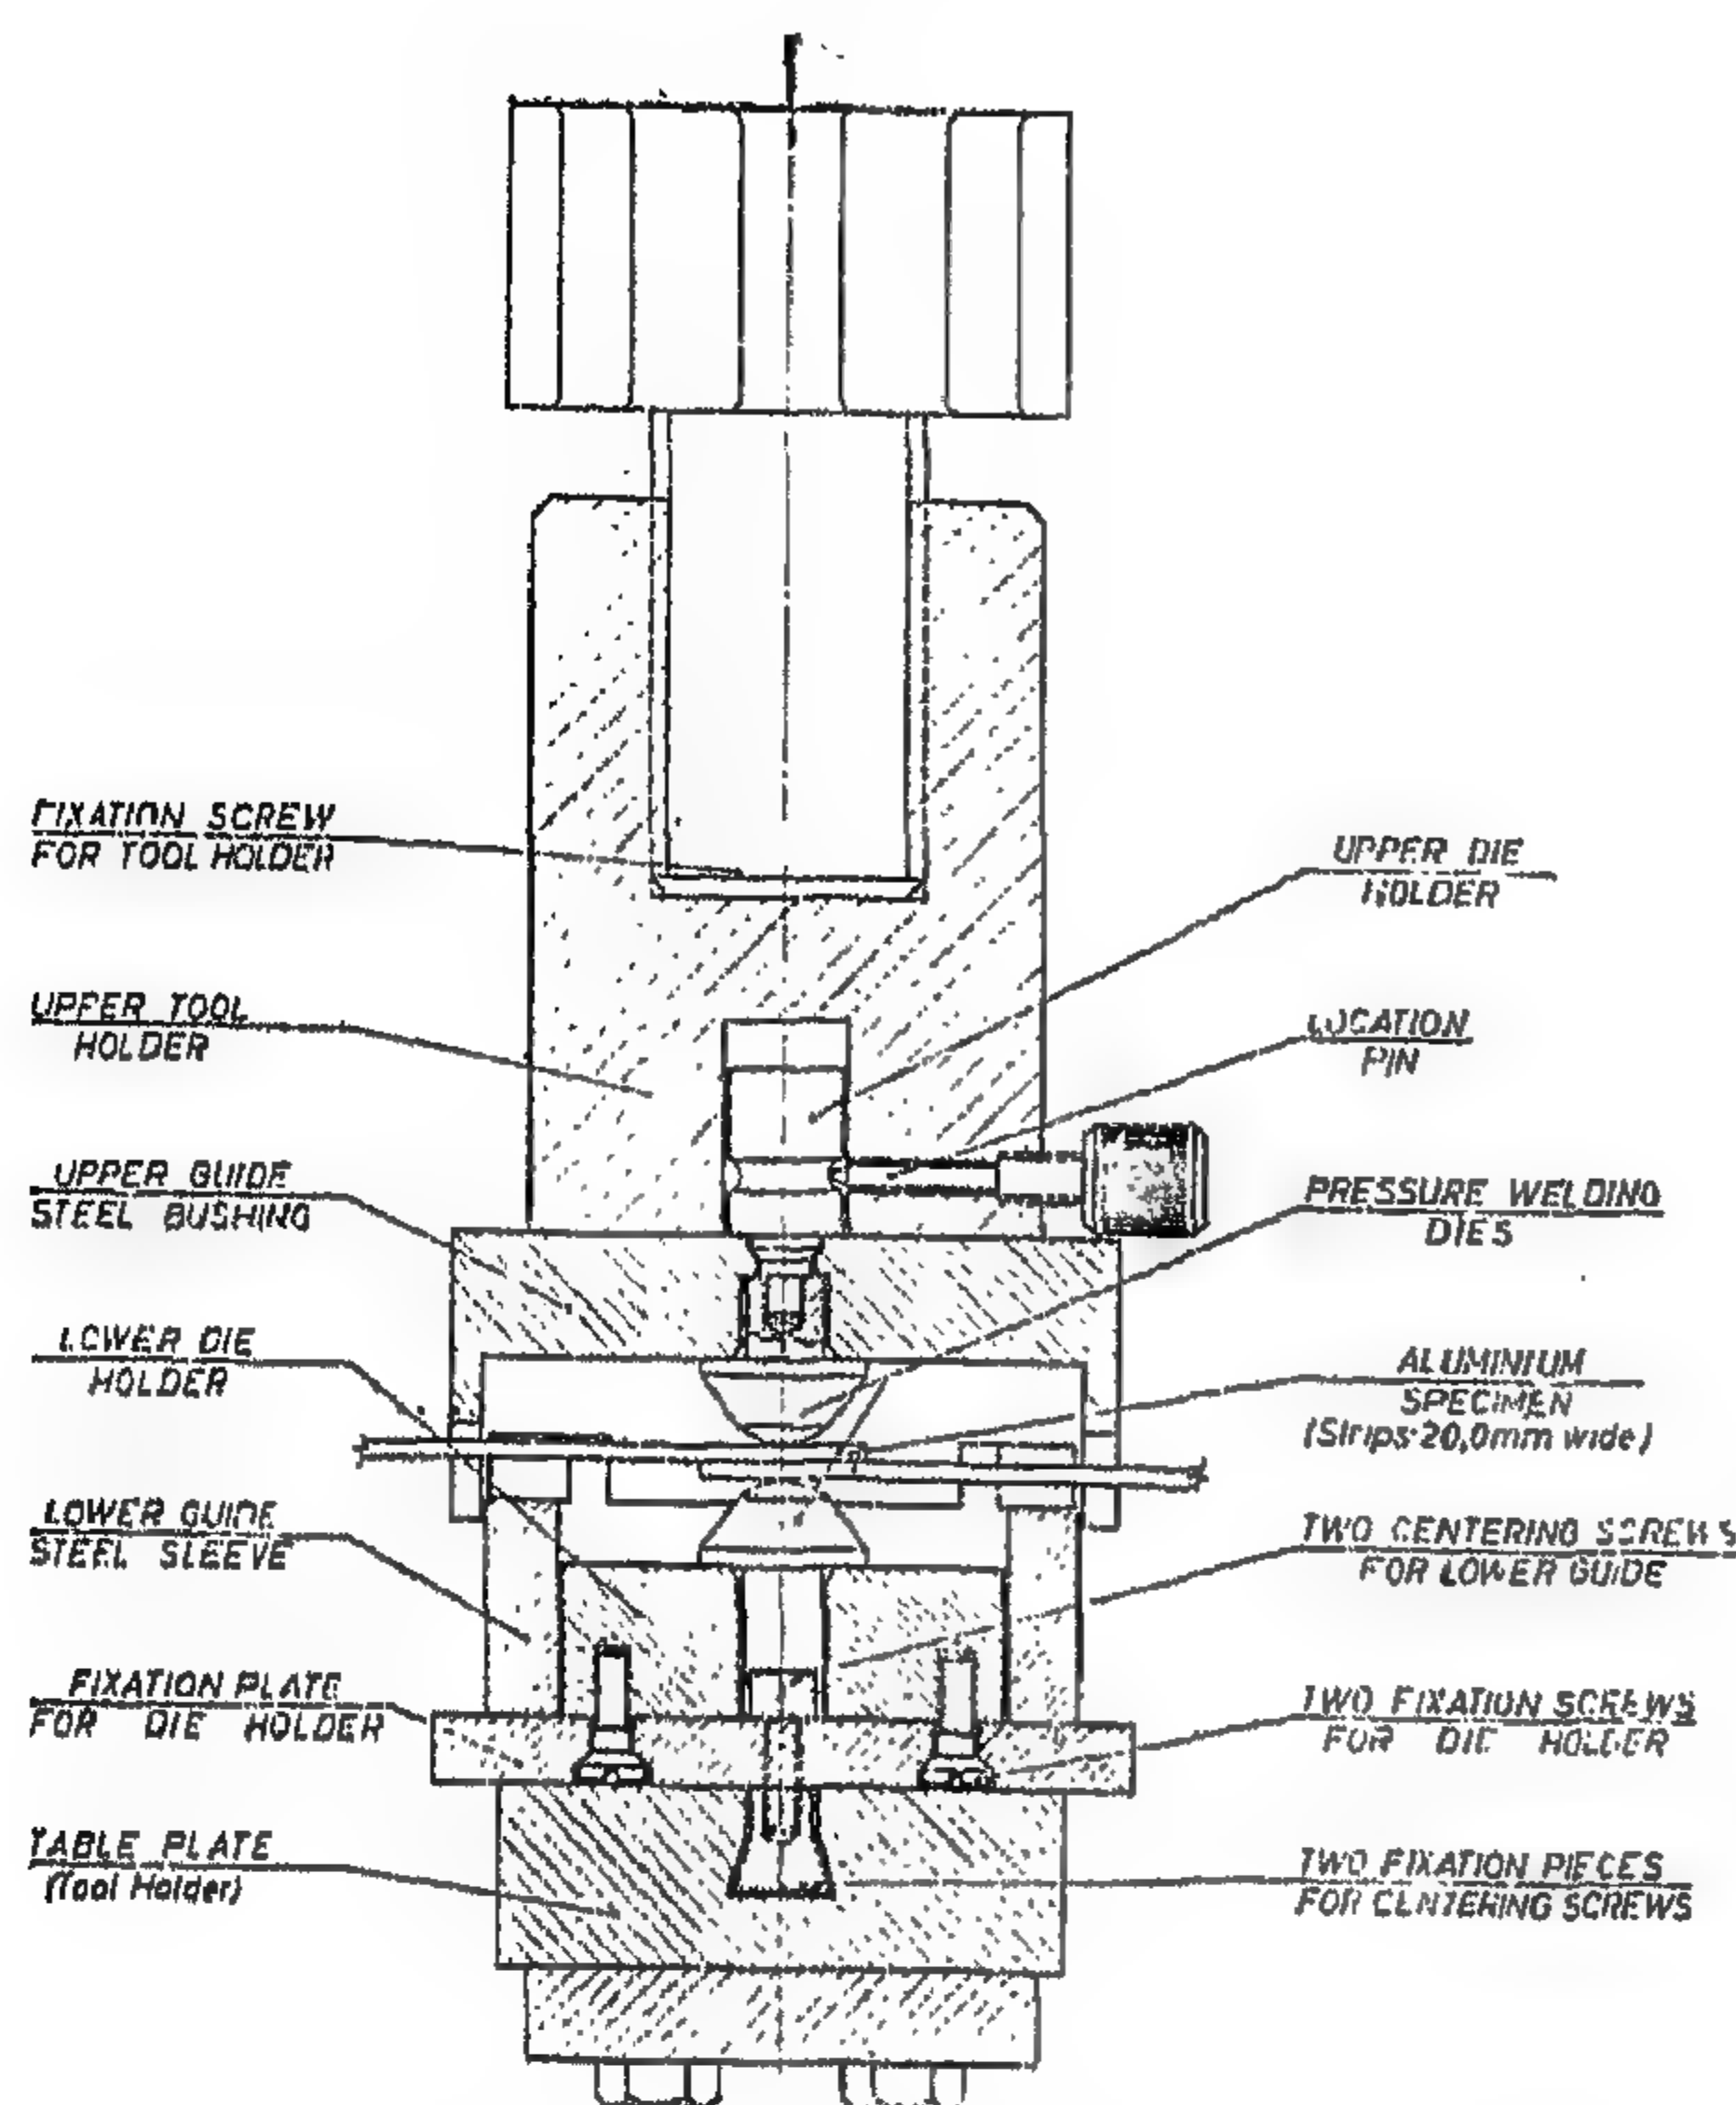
Pressure welding apparatus used for the Lap Welding Tests.
